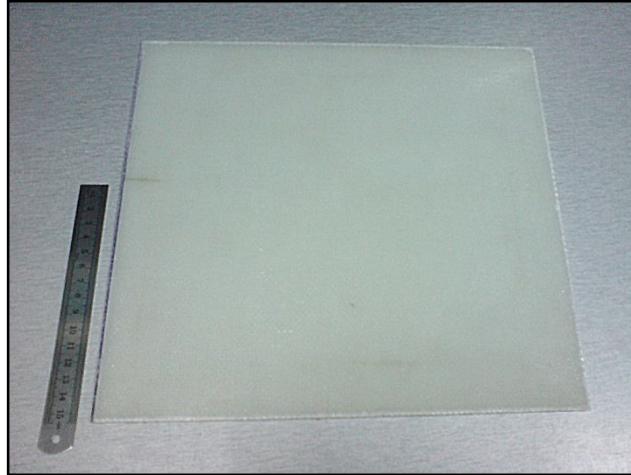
Fabricated GFRE composite sample (300x300 mm)
